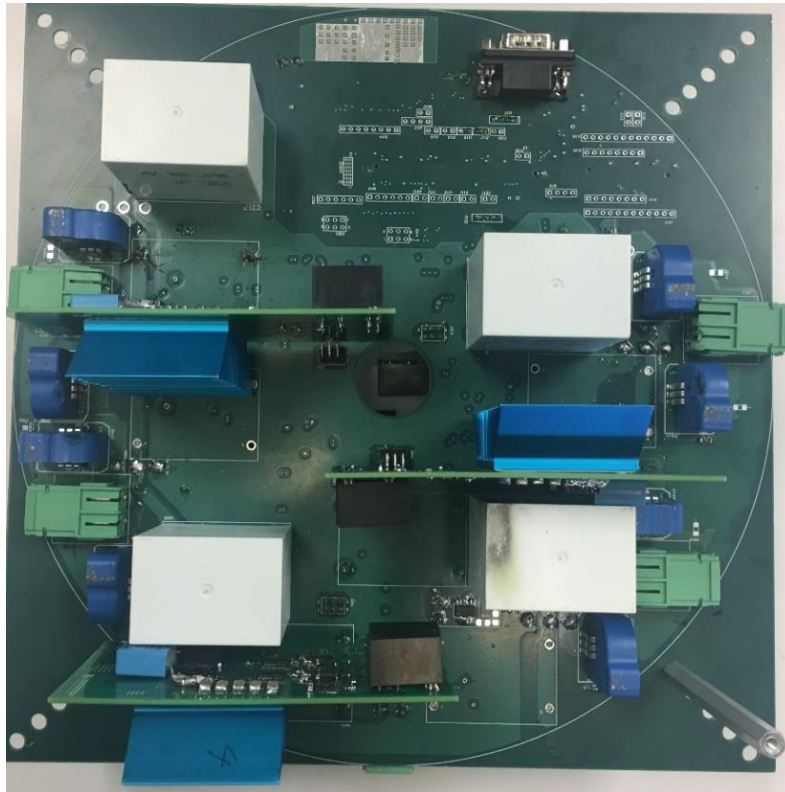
Bottom view of the 6-phase GaN-based motor drive.
